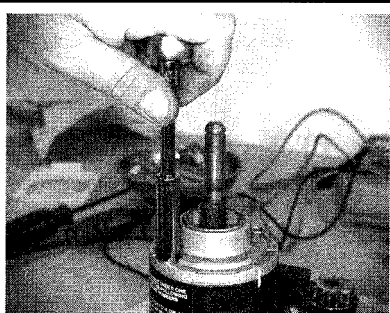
Remove the starter housing through-bolts(usually 2) ...
